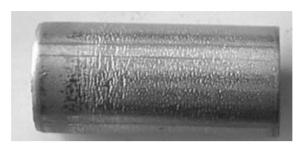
Surface roughness, caused by excessive lubrication Source: Forschungsgesellschaft Umformtechnik
